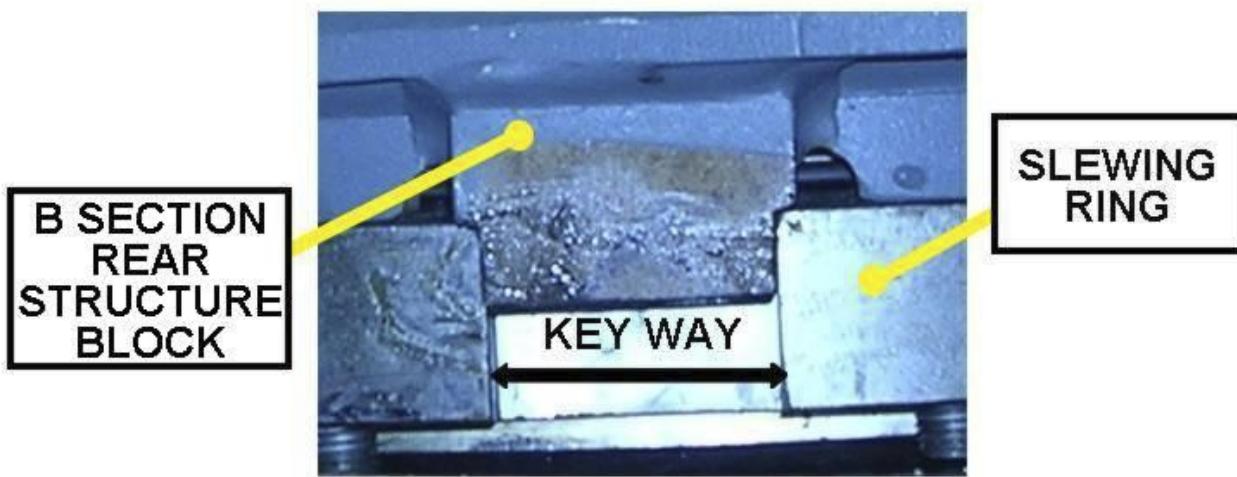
STRUCTURE BLOCK & SLEWING RING KEYWAY MATCHING
